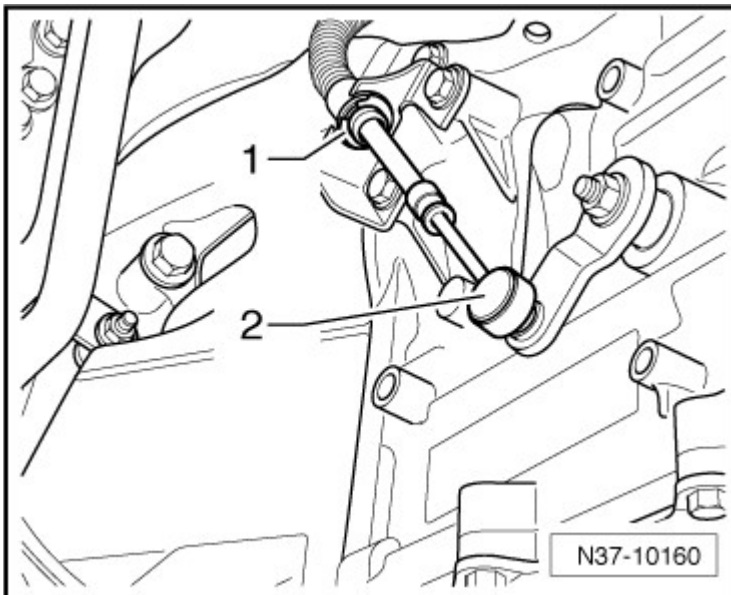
Identifying Locking Washer & Selector Lever Cable
